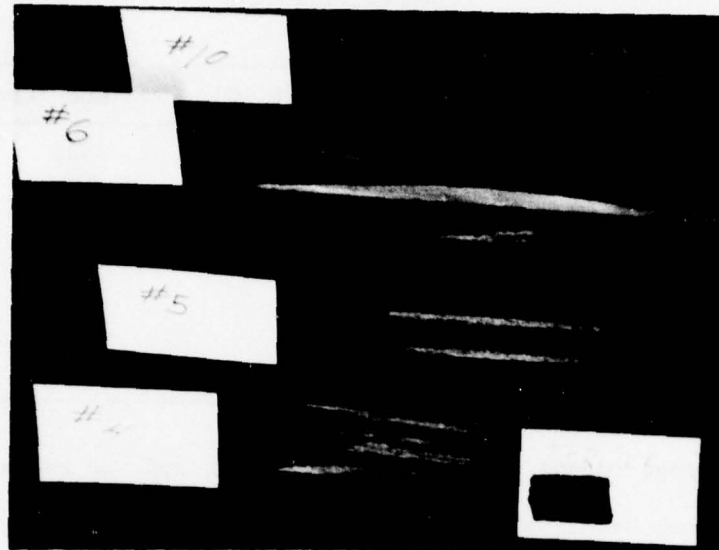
Torsion Failures. Specimens 4,5,6 and 10
